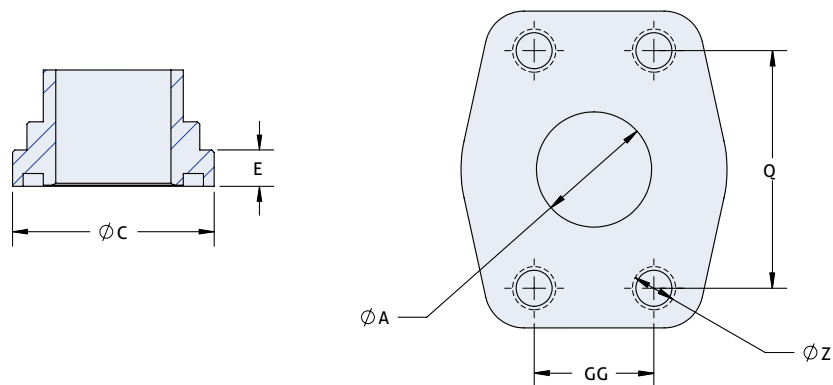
Code 61 and 62 Figures of the flange (Left) and bolt pattern (Right)
